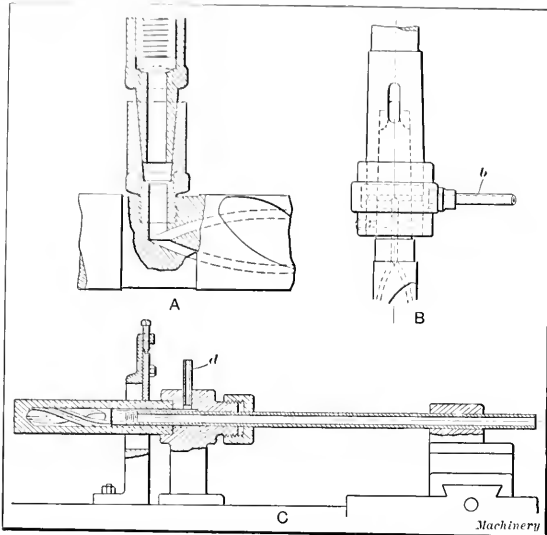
A, Connection to Oil Passages of Stationary Drill; B, Connection to Oil Passages of Rotating Drill; C, Method of Lubricating Hollow Drill for Deep Hole Work
